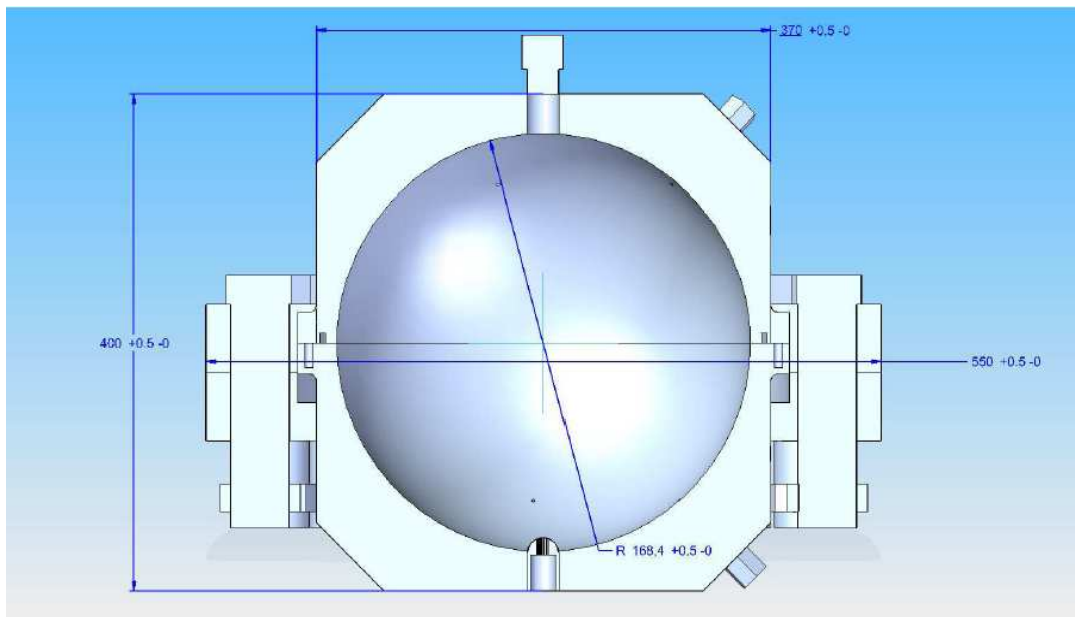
Section of final design of R-20 ignition chamber with key dimensions in mm.
